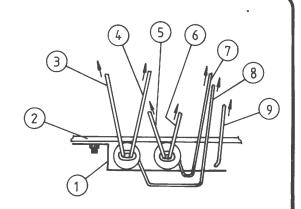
FRONT PANEL ASSEMBLY TERMINAL WIRING
